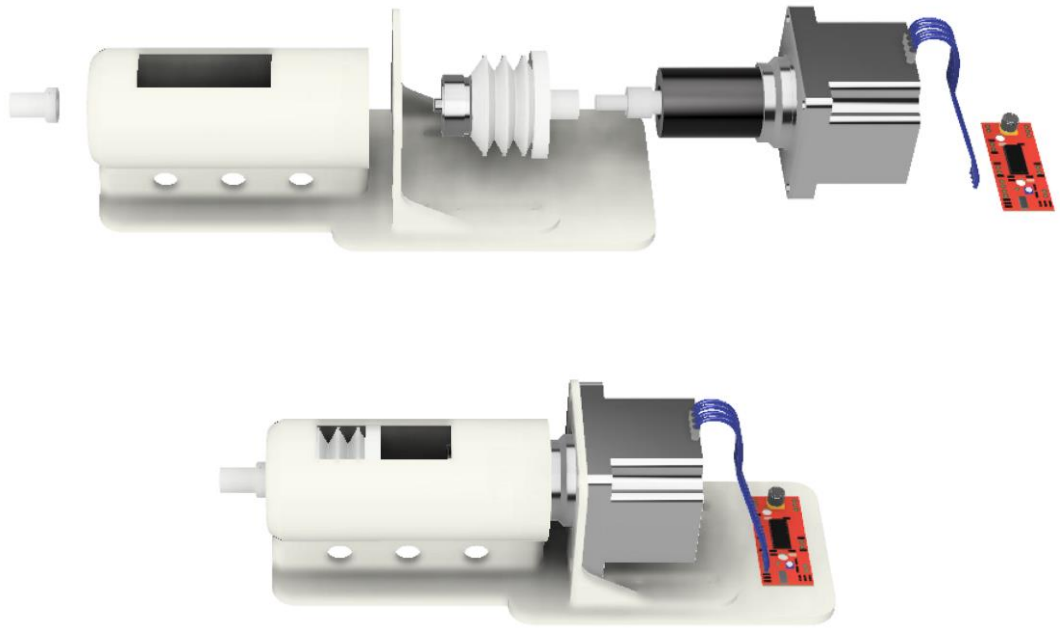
3D CAD model assembly of the pneumatic cuff driver.
